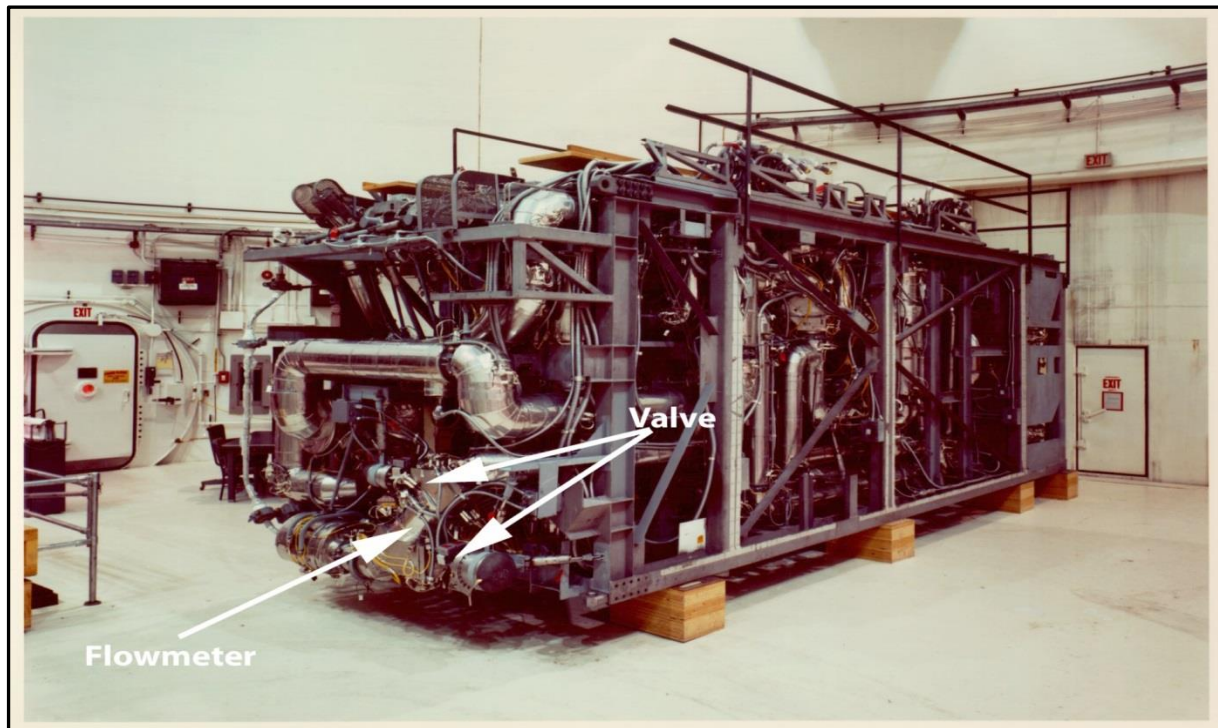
Fabricated Closed Loop System Primary Heat Removal Module (PHRM) Ready for Installation in FFTF
